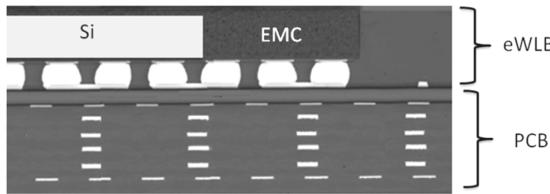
Schematics of cross-section of eWLB mounted PCB of Fig. 6.
